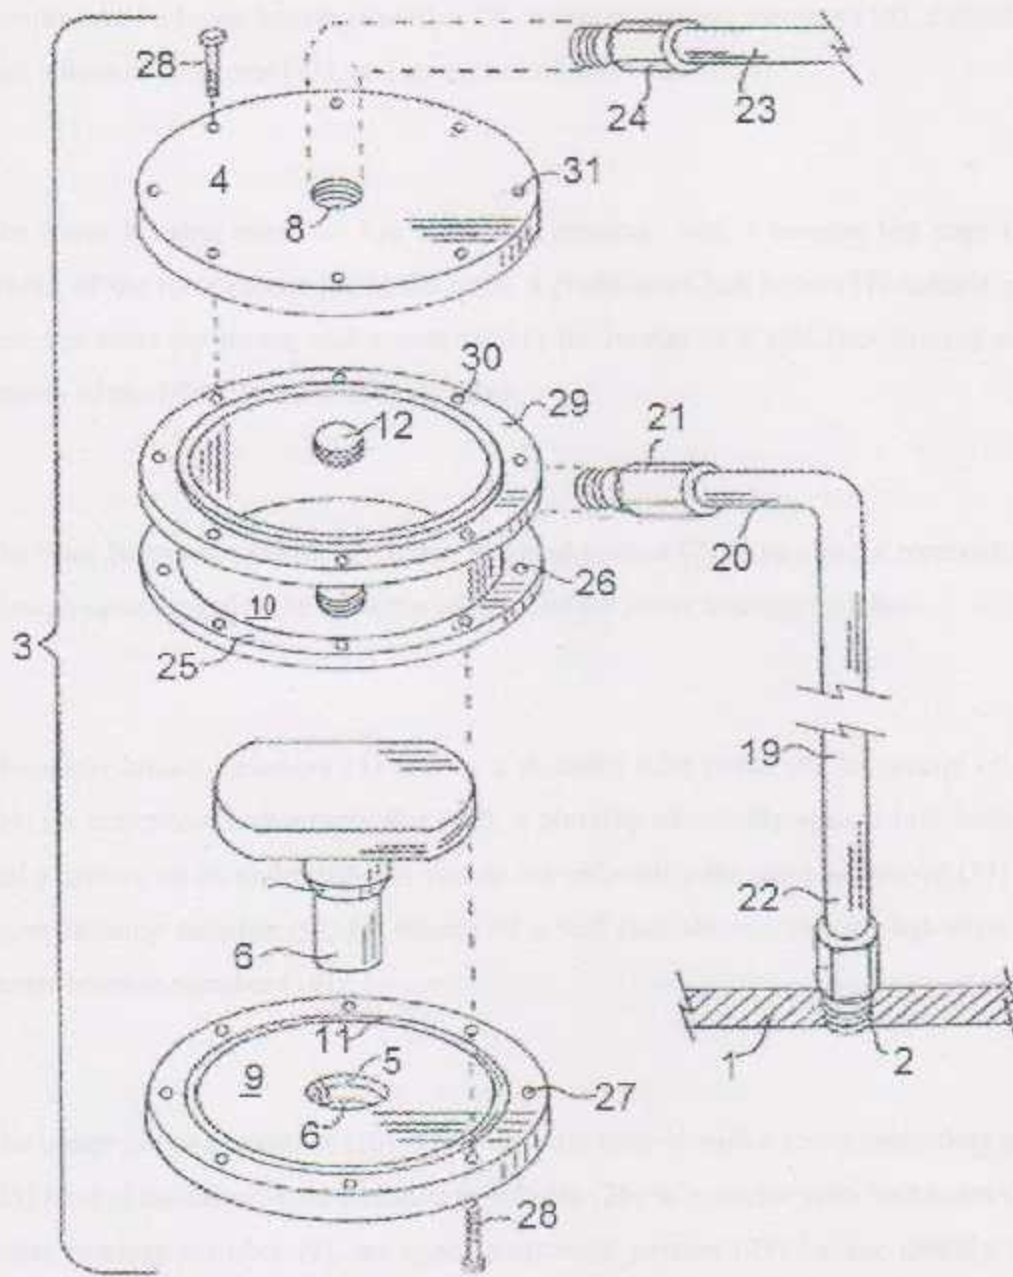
Exploded view of the pneumatic distributor constructed in accordance with this project
